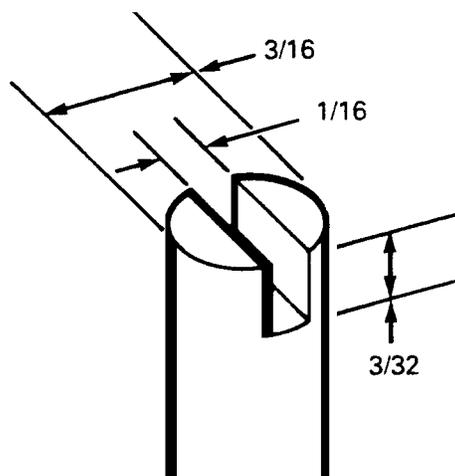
Front Sight Blade Securing Screw Removal Tool
